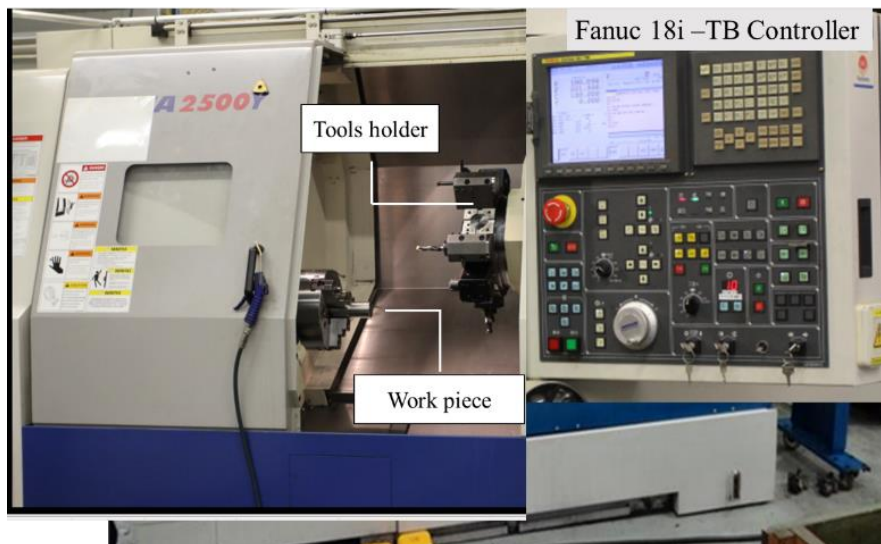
Representation of the PUMA 2500Y CNC-lathe machining centre and machining set up.
